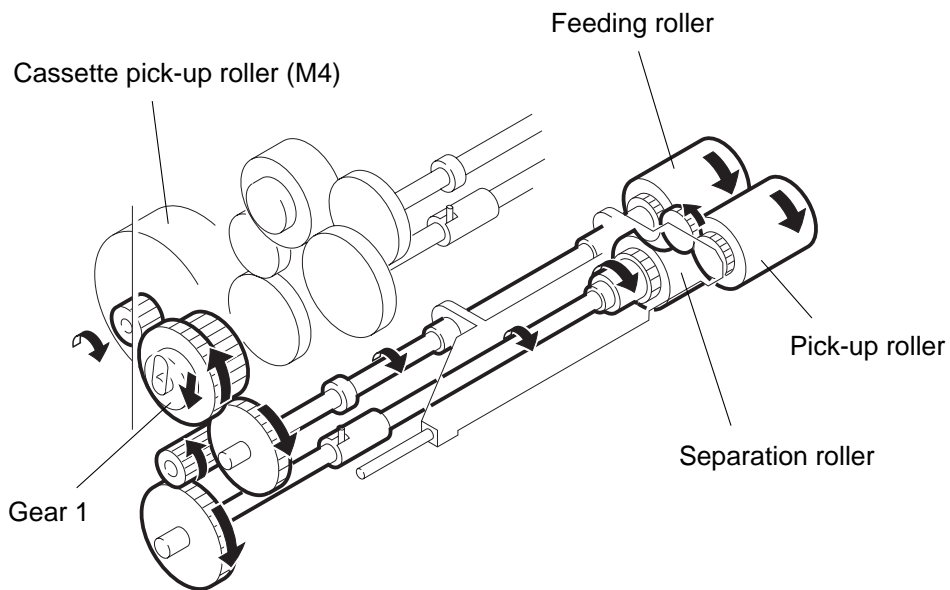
Pick-Up Drive for the Lower Cassette (pick-up motor rotating CCW)
